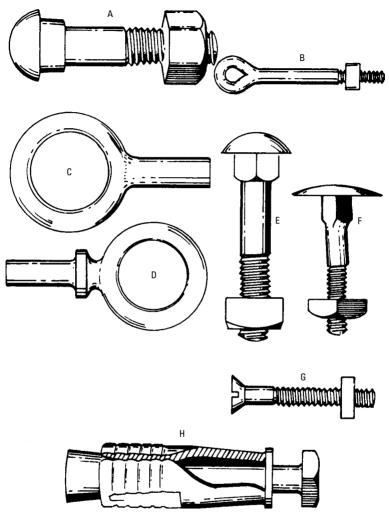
Various bolts. In the figure, (A) is a railroad track bolt, (B) a welded eye bolt, (C) a plain forged eye bolt, (D) a shouldered eye bolt, (E) a carriage bolt, (F) a step bolt, (G) a stove bolt, and (H) an expansion bolt.
